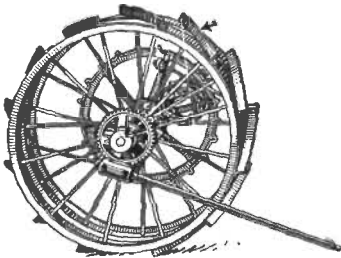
Binder main wheel showing lugs, driving sprocket and raising mechanism.
